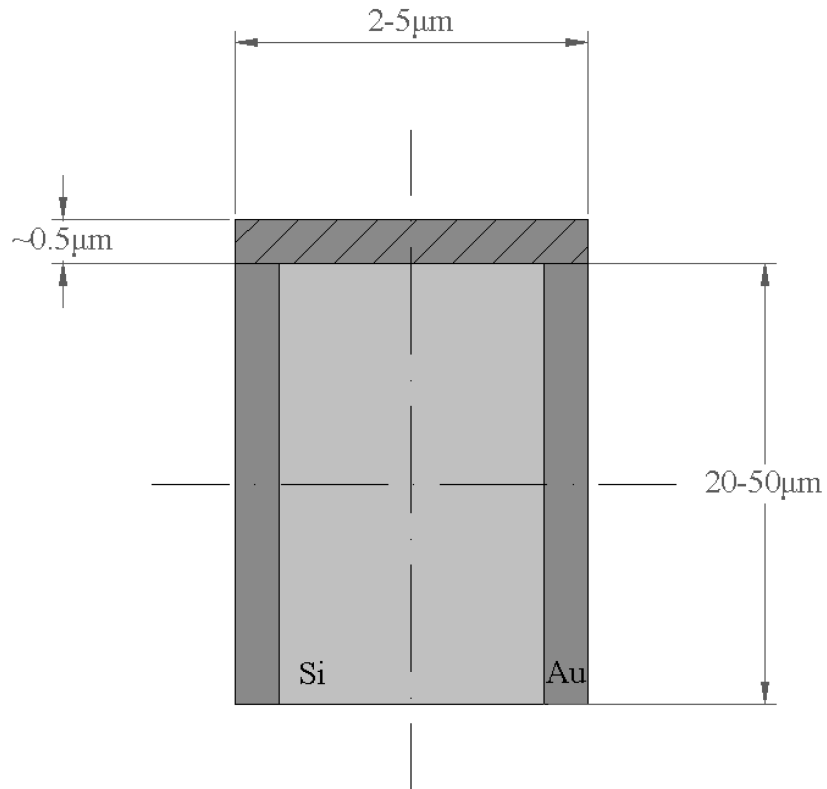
Cross section of a single crystal beam with a Au cladding layer.
